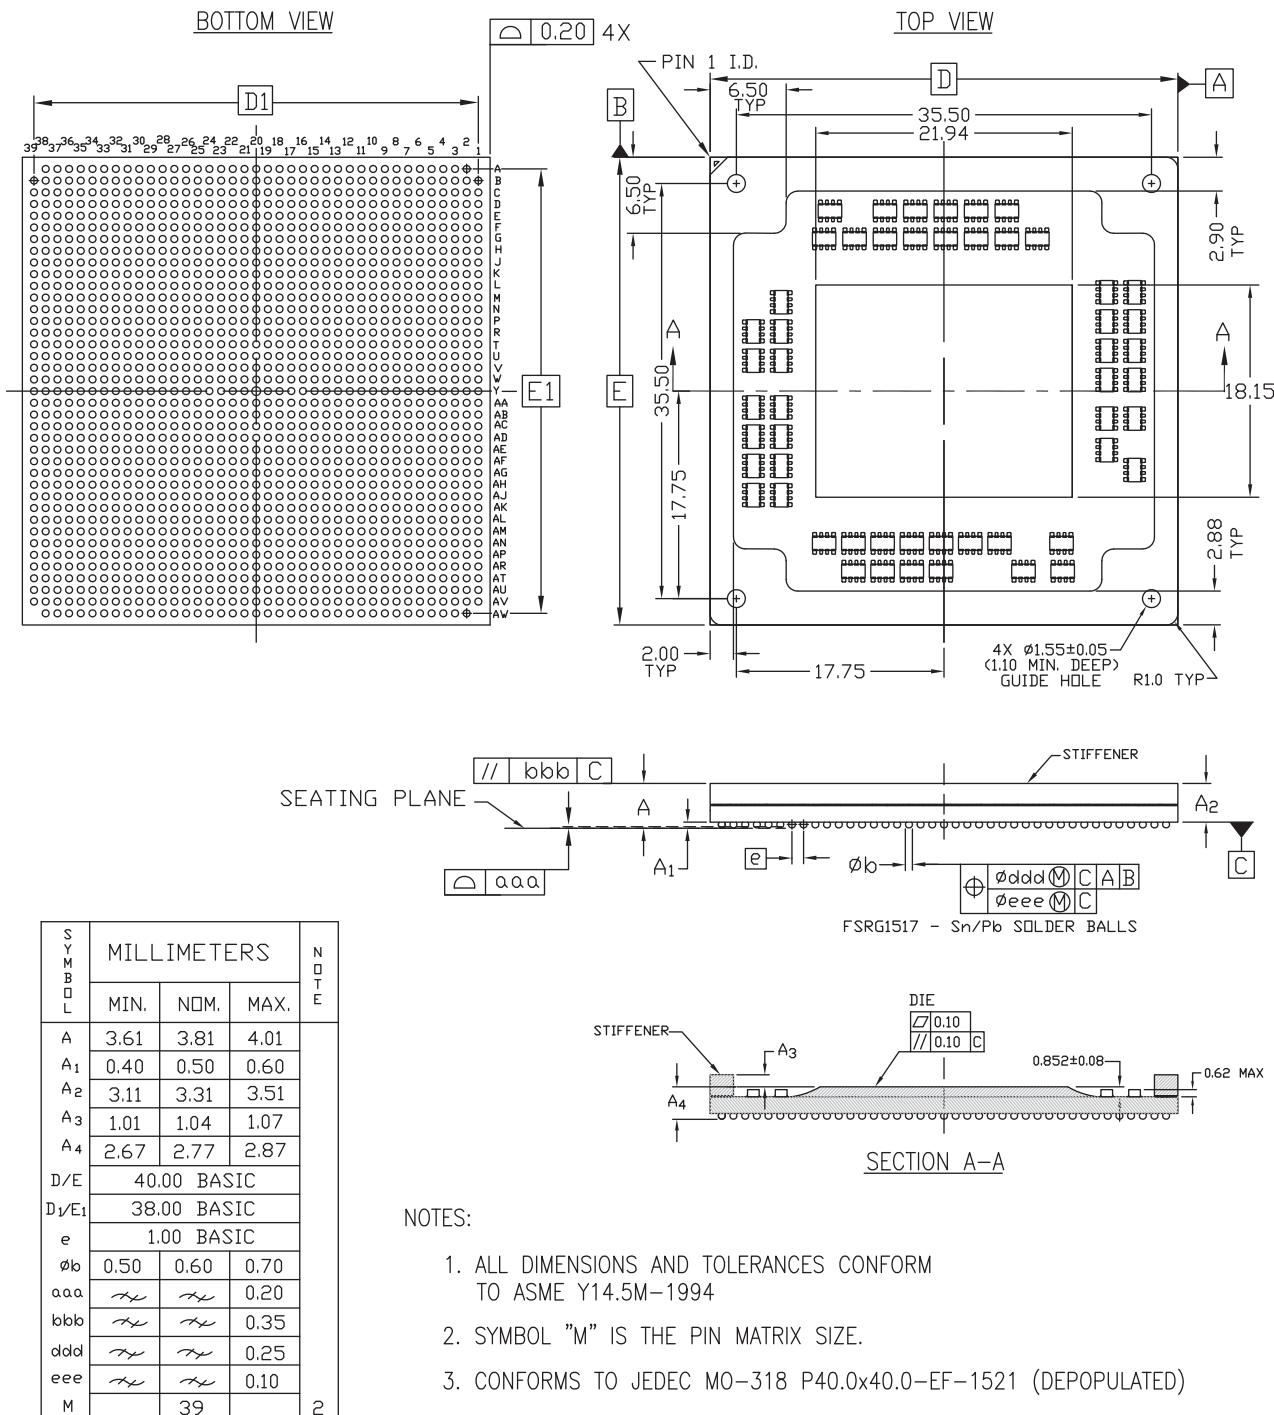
Package Dimensions for FSRG1517 (XQZU48DR)
